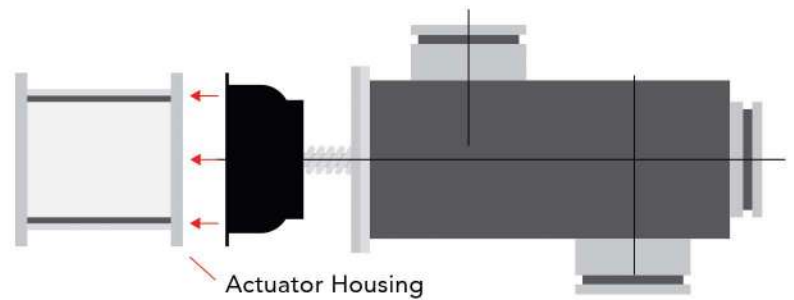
REMOVE BOLT & DIAPHRAGM DISC
